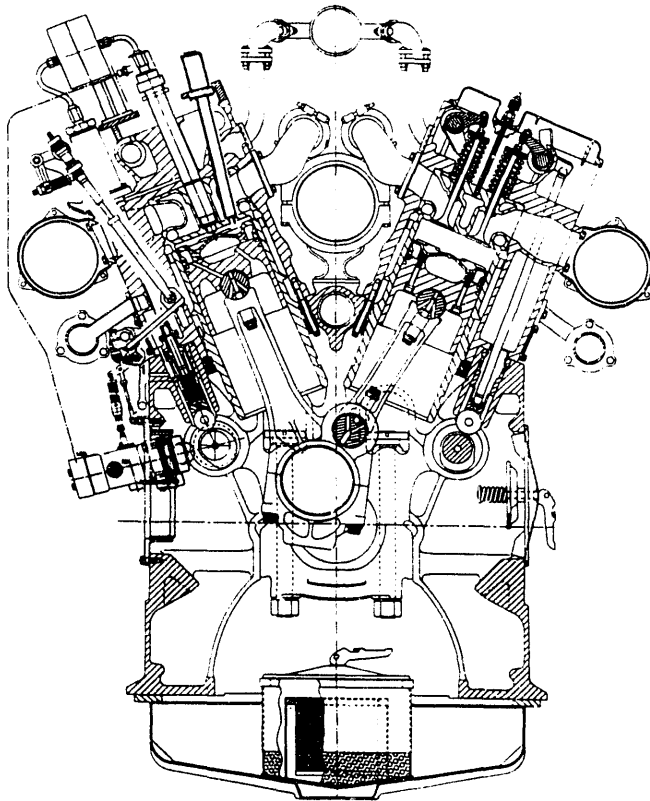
Stage I Coal-Fueled Diesel Engine Cross-Section Layout
